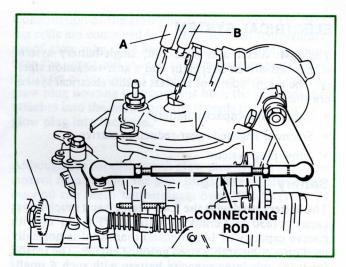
Connections for Checking and Adjusting the Vacuum Regulator
